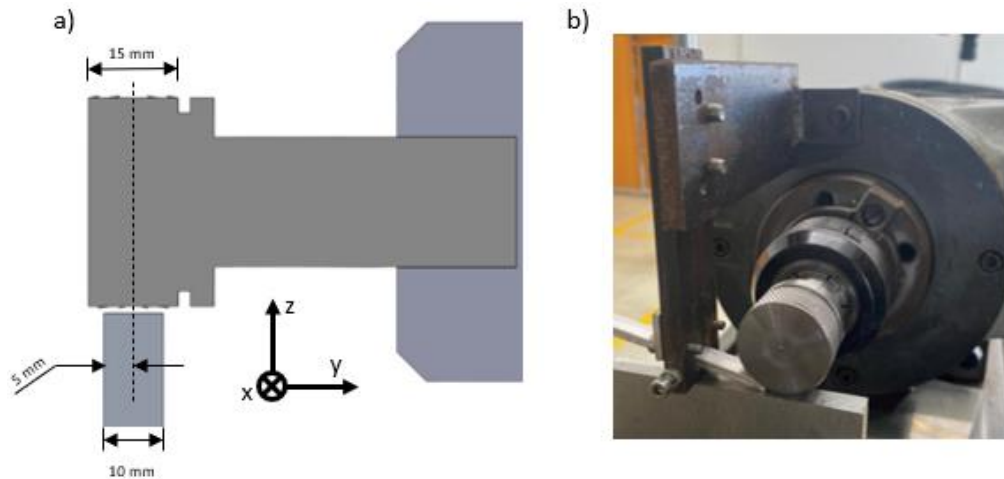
Tool for FRAM tests: a) 3D modeling of the tool position; b) Tool setup on the milling machine.
